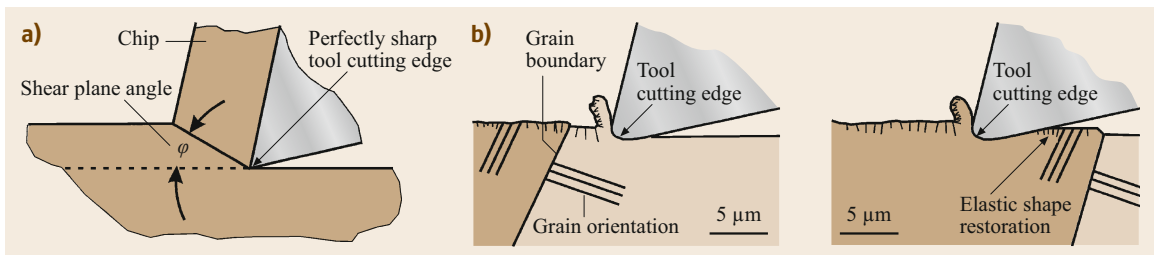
(a) Conventional orthogonal cutting and (b) microcutting showing finite tool cutting edge geometry and workpiece anisotropy
